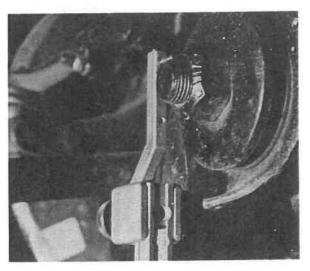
Fixed Pin Attachment used to mount gauge to lower control arm mounting bolt in front section. The narrow width of attachment allows mounting the gauge to the bolt shown. If bolt were longer, the Roll Pin on the end of the scale could be used to mount the gauge.
